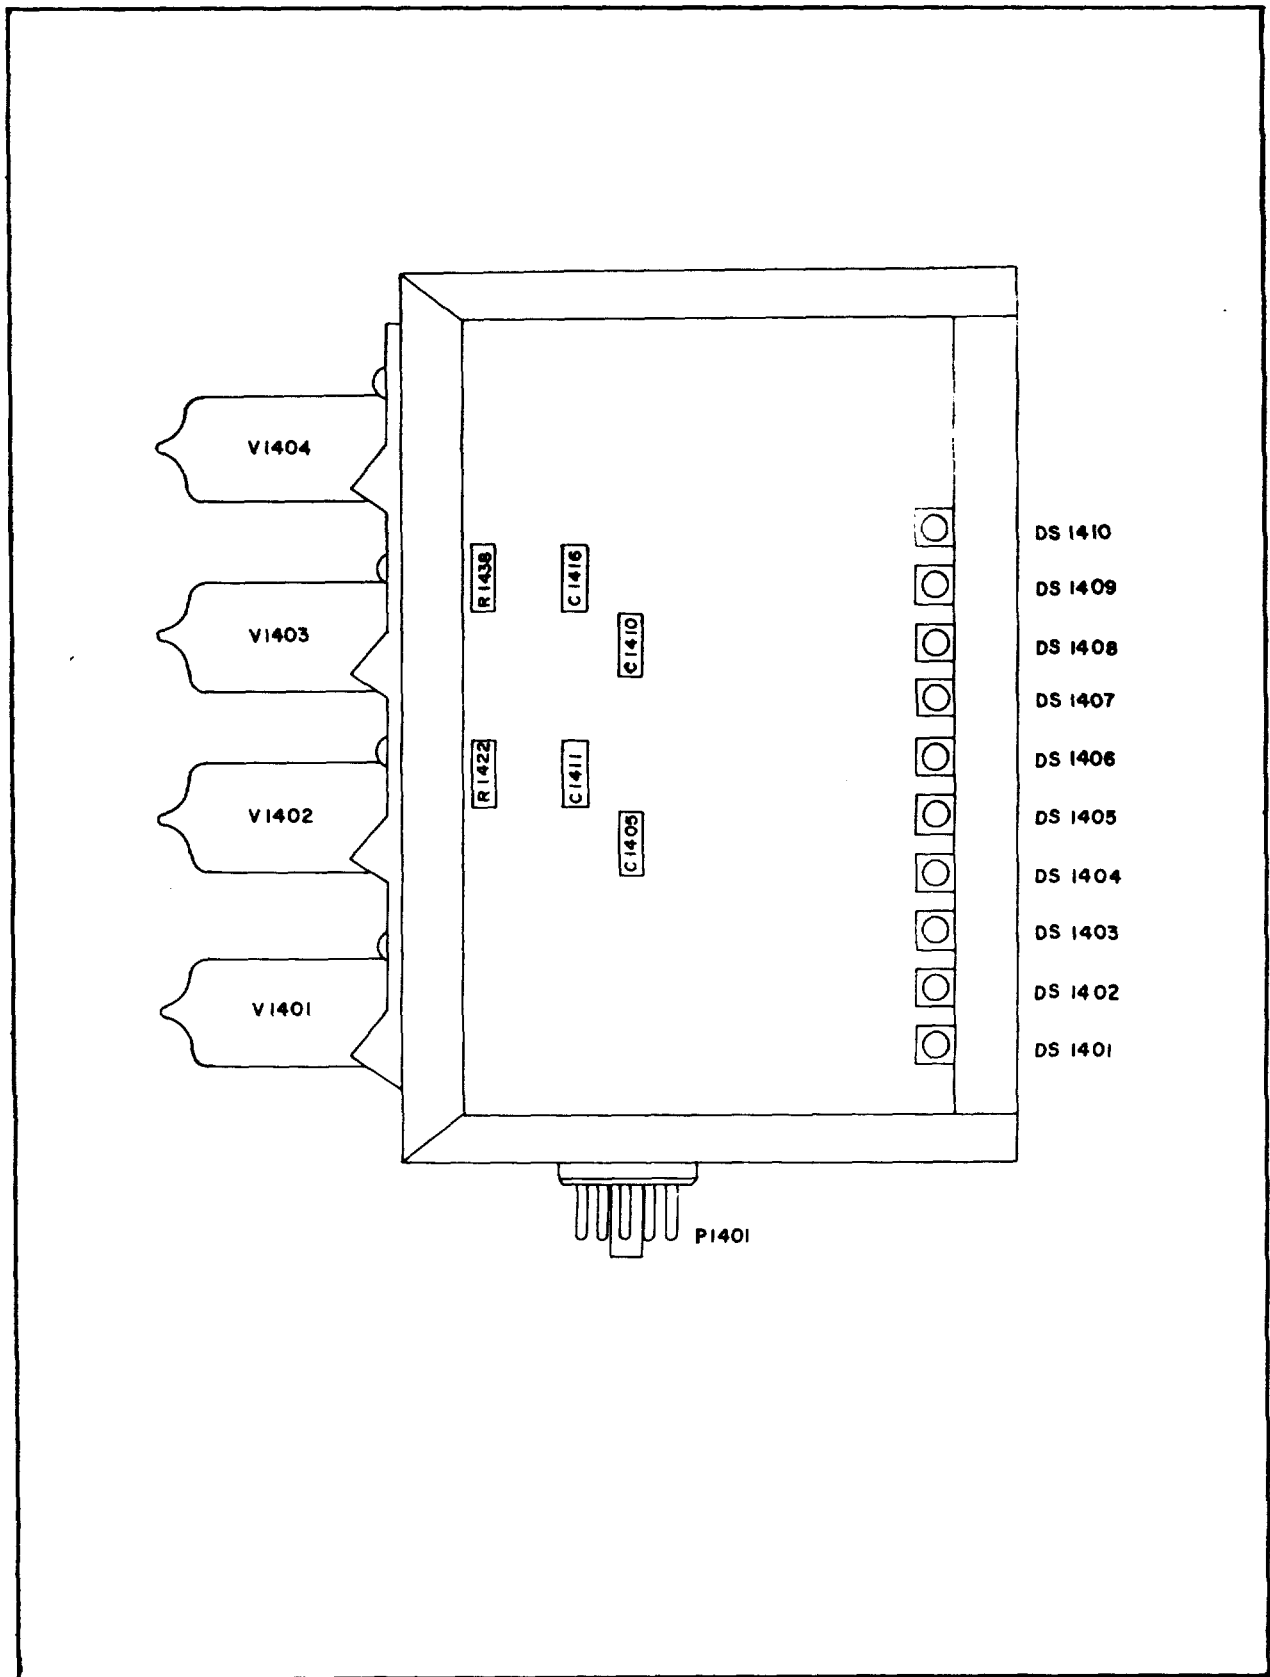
Left Side View Parts Layout of Decade Counter, Z-1200
